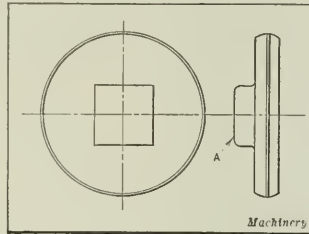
Type of Forging handled by Device shown in Fig. 2
